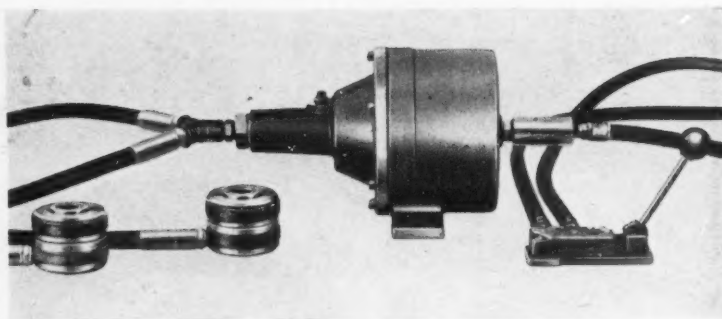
PowRock Air-hydraulic Clamping Equipment
